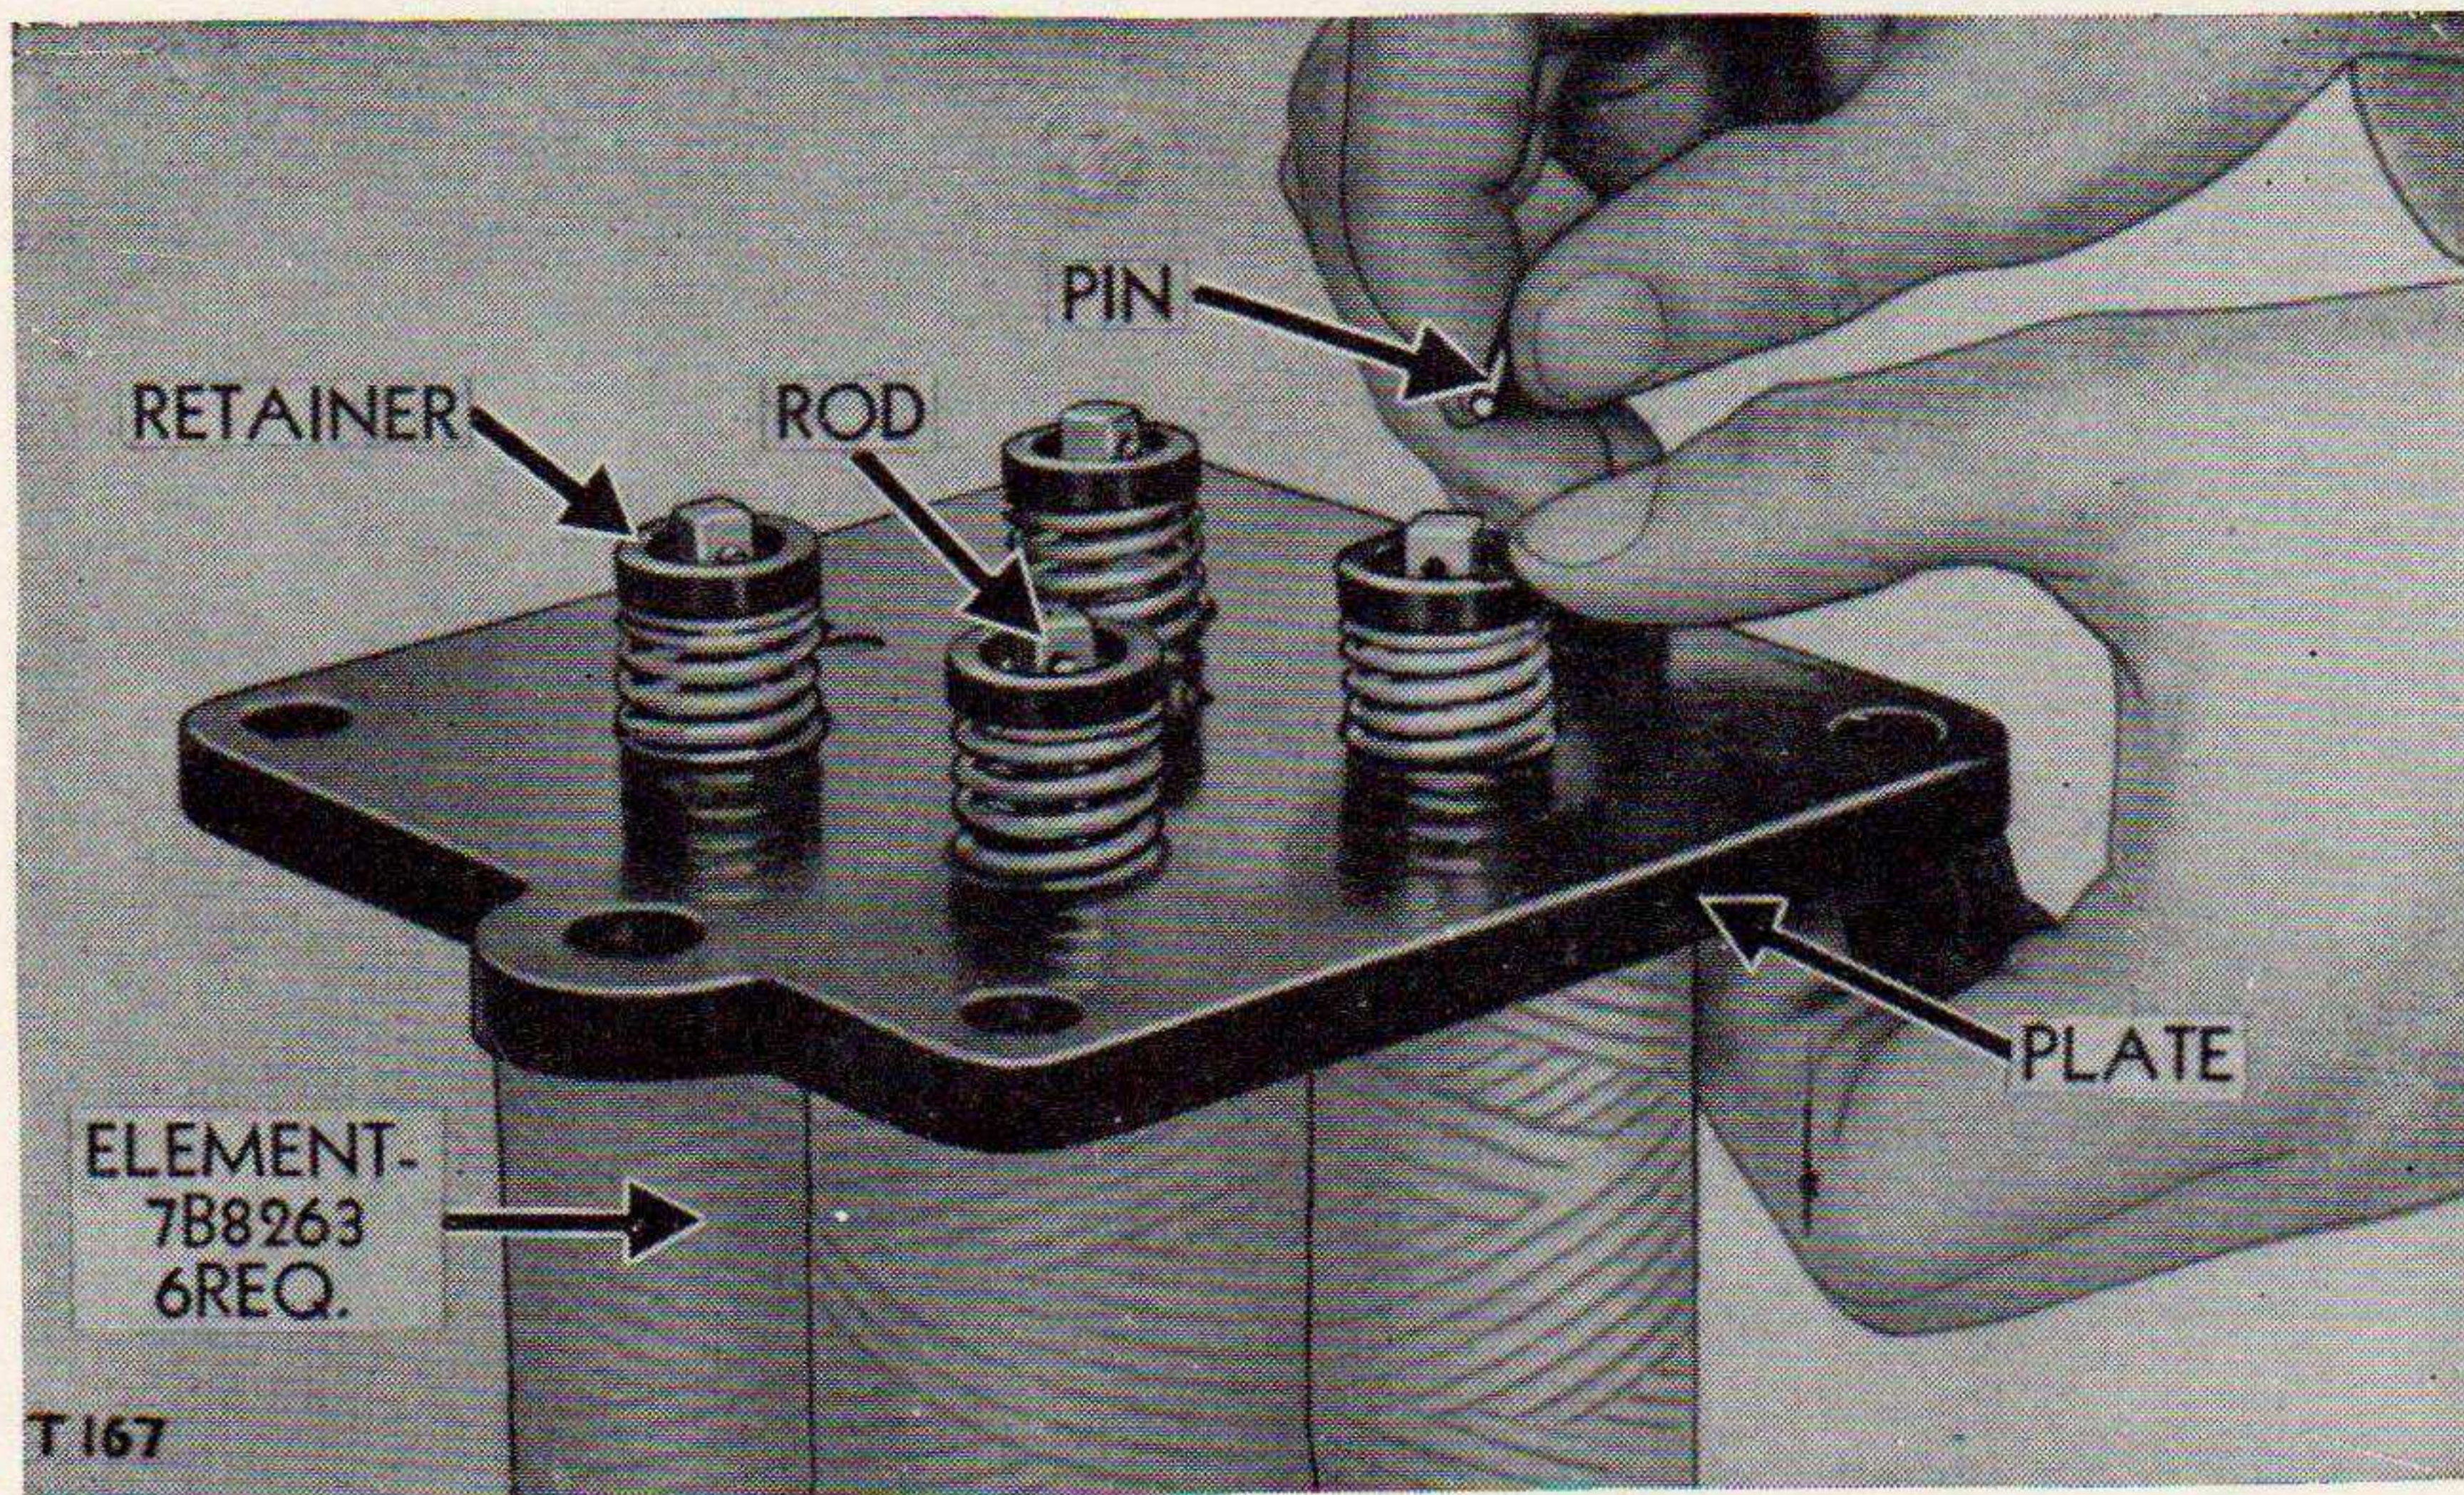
Removing filter elements (assembly 7B8264) from plate.
